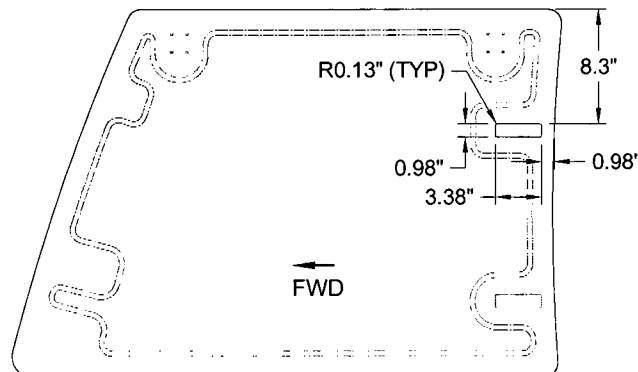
(b). D3186-2 SPACEPOD DOOR LATCH CUTOUT
